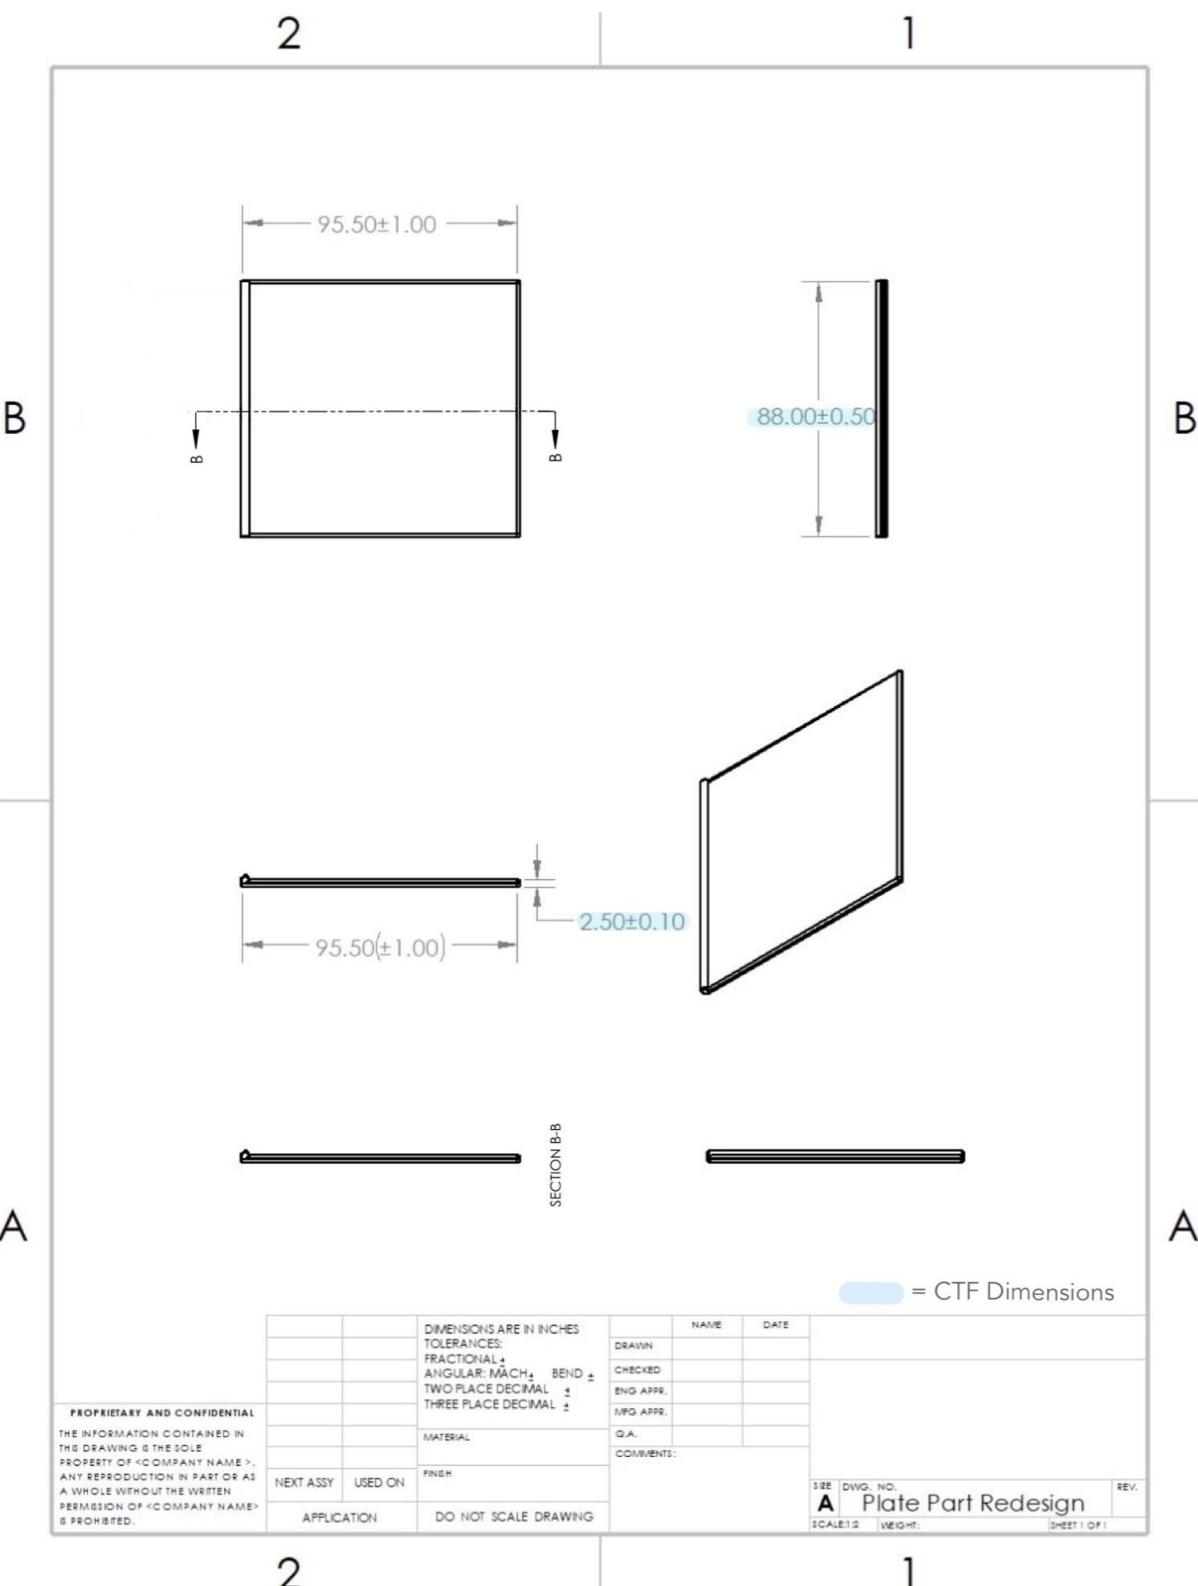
Dimensioned Drawing of Removable Plate with cross section view
